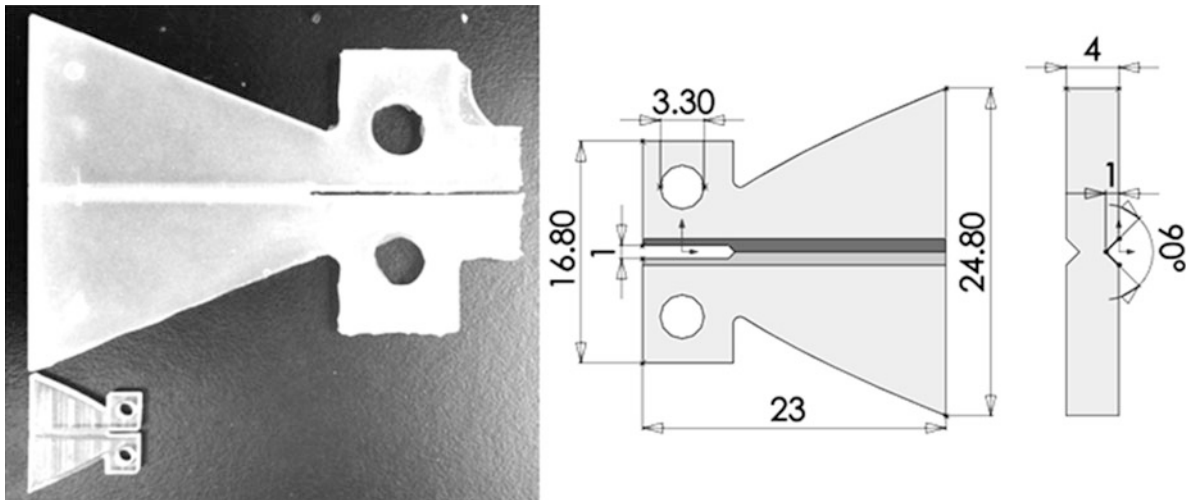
Standard TDCB shape (*larger*) and new CTDCB dimensions (*compact*) [5]
